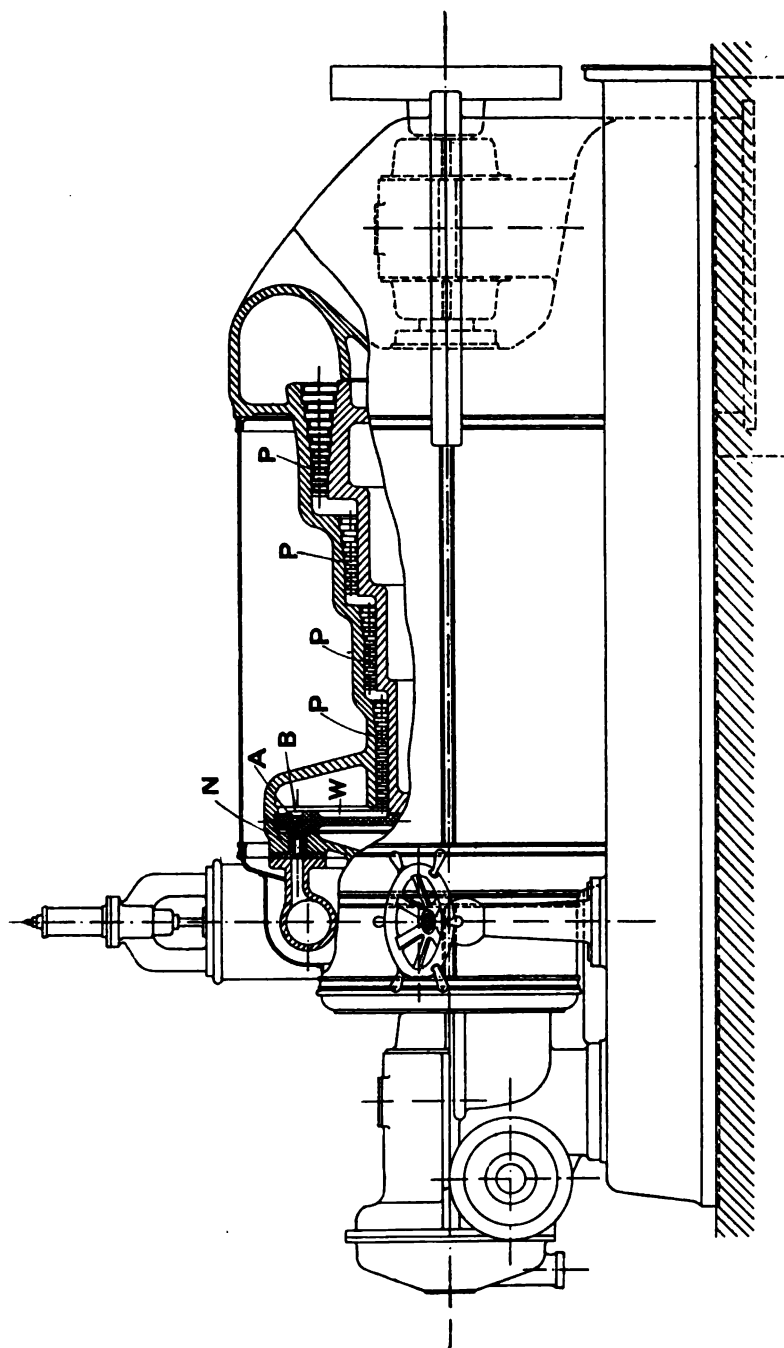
Elevation partly in section of Sulzer Steam Turbine.
